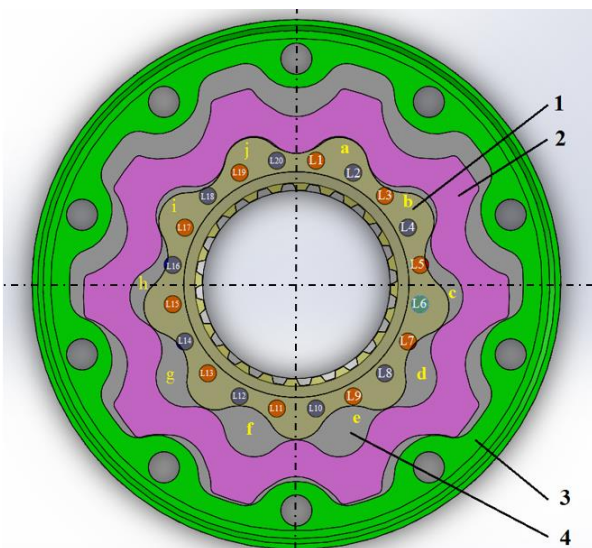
Four basic parts of the hydraulic motor ($\Phi 174 \text{ mm}$)
